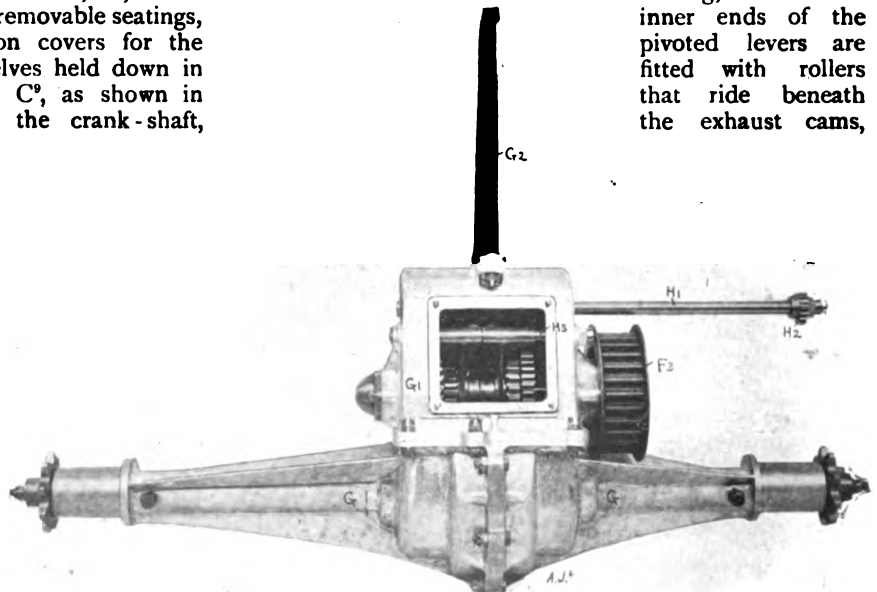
The 8-h.p. Wolseley Chassis. View of the combined Gear-Box and Differential Countershaft, which form a single unit, that is fixed adjustably for tightening the Driving Chain, and with a Three-Point Suspension, to the Main-Frame.
